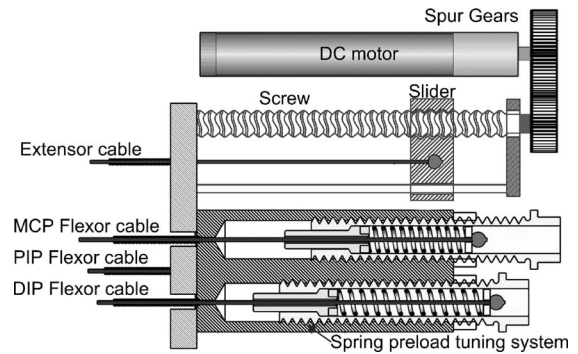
Actuation unit: at the top the extension unit made of the motor connected by gears to a screw and to the slider that pulls the extension cable; at the bottom the flexion unit made of three passive compression springs, each one connected, through a cable, to a single joint. Note that in figure two of the three springs preload mechanisms are clearly visible that allow us to increase the springs preload if unscrewed.
